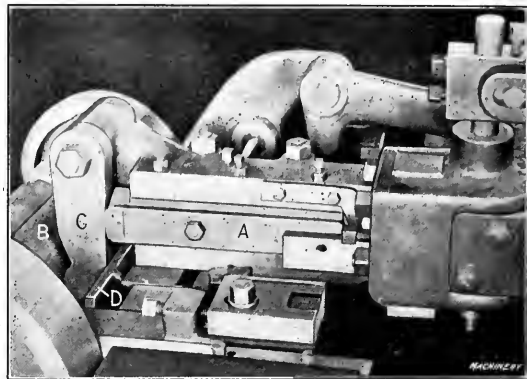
Cut-off Mechanism of Nilson Wire Forming Machine
